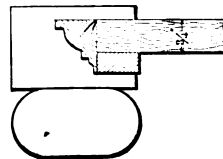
Section of Bottom Shelf.—Scale, 8 Inches to the Foot.
